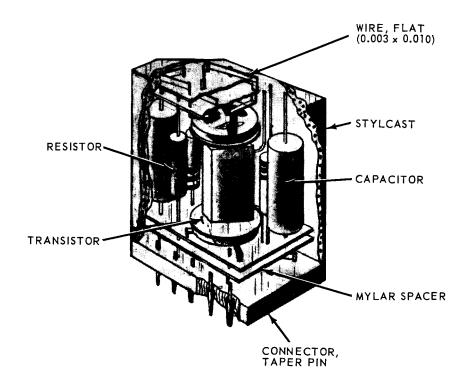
(b) Command Receiver Assembly Cutaway View
